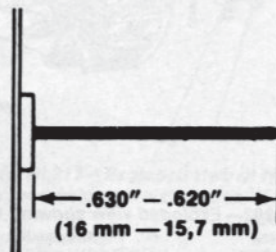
Plunger length must be 0.620-0.630 inch from collar to end.
